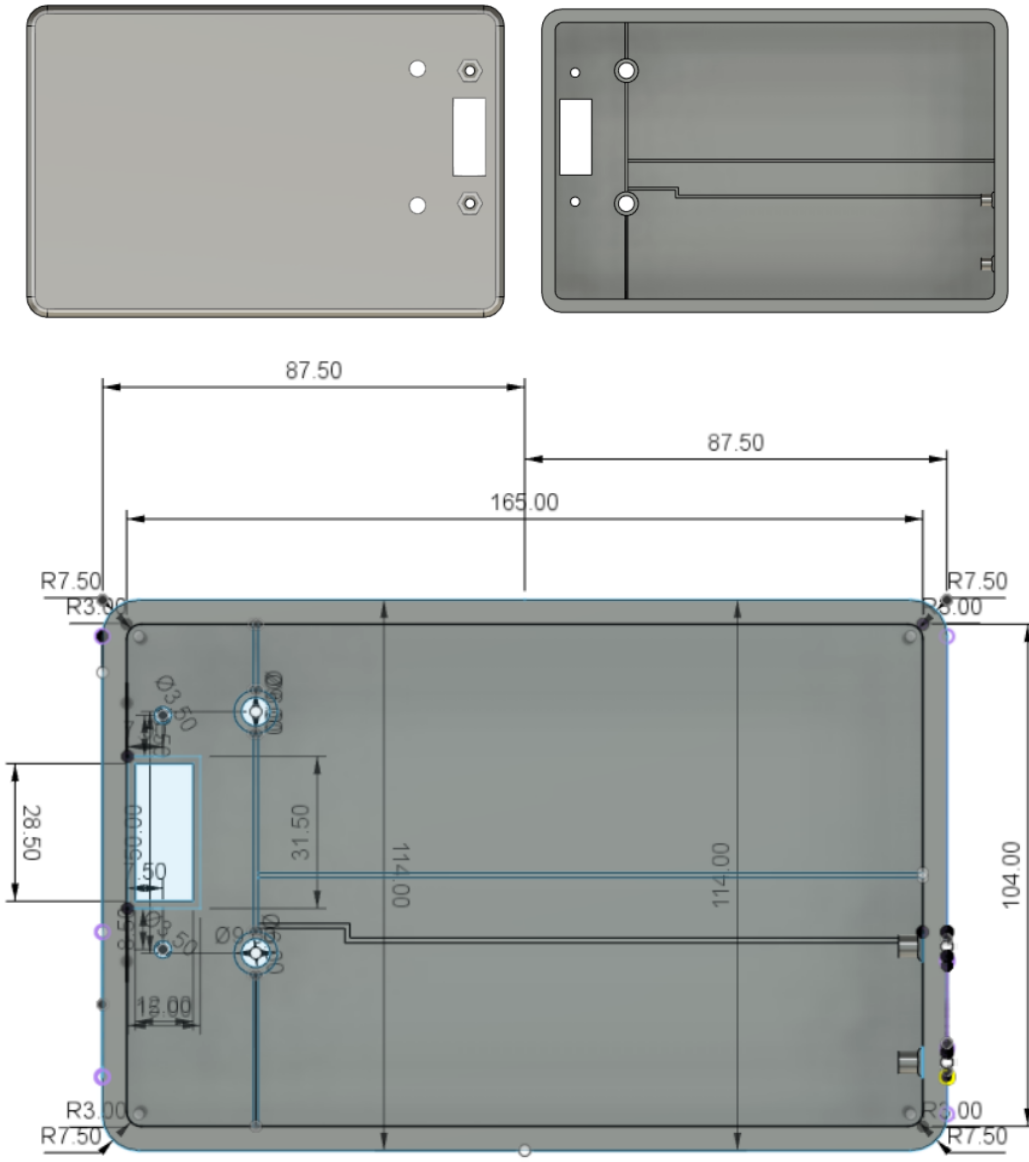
Enclosure CAD drawing, body. Bottom view (left), top view (right) and dimensions (bottom).
